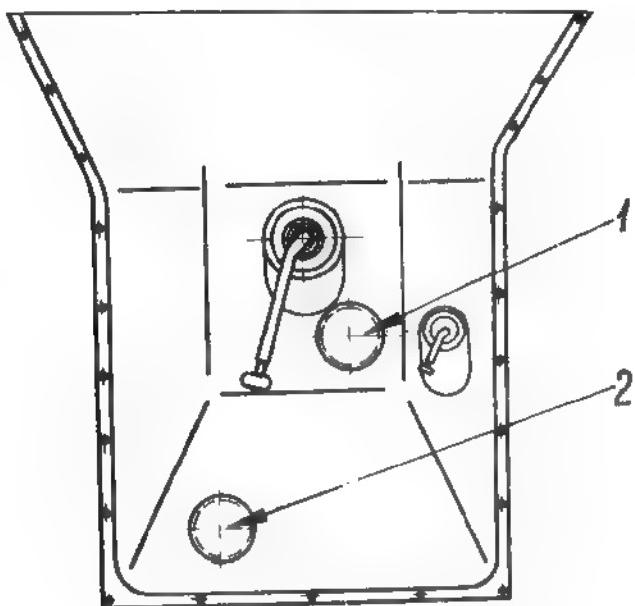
LOCATION OF GEARBOX TRANSFERBOX FILLER PLUGS.
